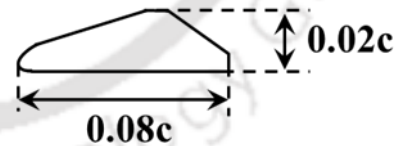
Cross sectional dimension of the wing-tip attachments
